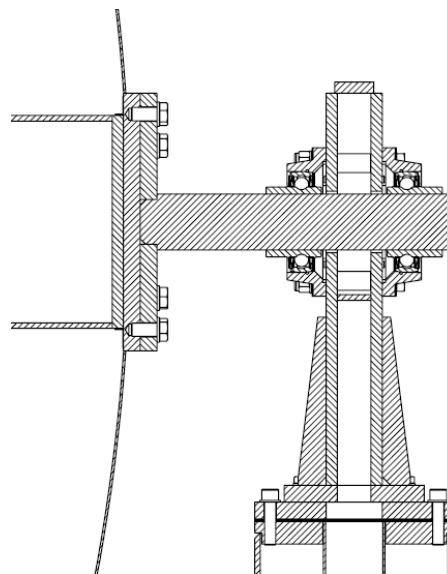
Joint between the free ring shaft and shaft carrier that allows axial movement
